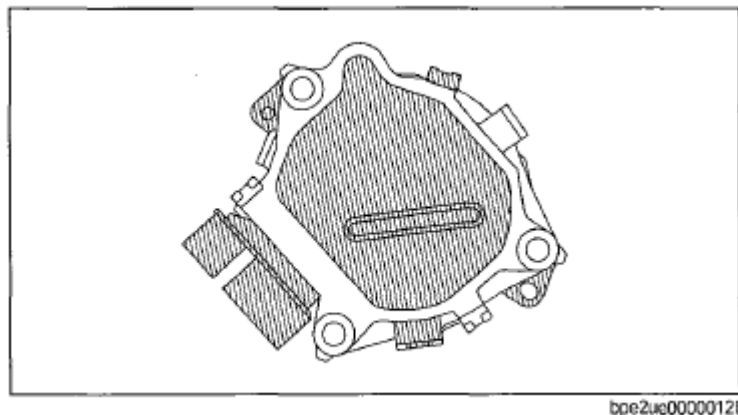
Locating Bolts, LH Camshaft Phaser And Sprocket
